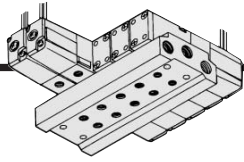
Hook this part onto the DIN rail and press down until a click is heard.
